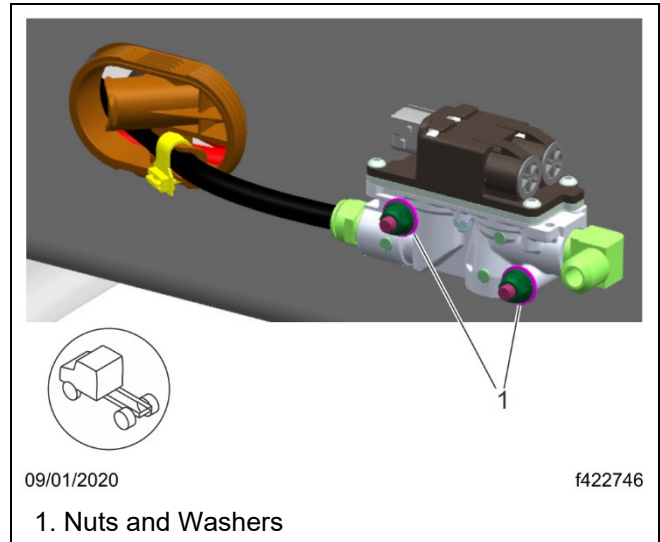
, Modulator Valve Fasteners, Outside Frame Rail View
